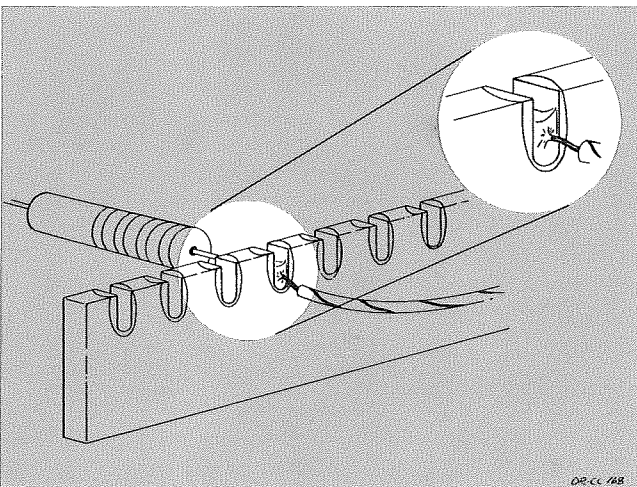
Apply only enough solder to cover the leads adequately.
